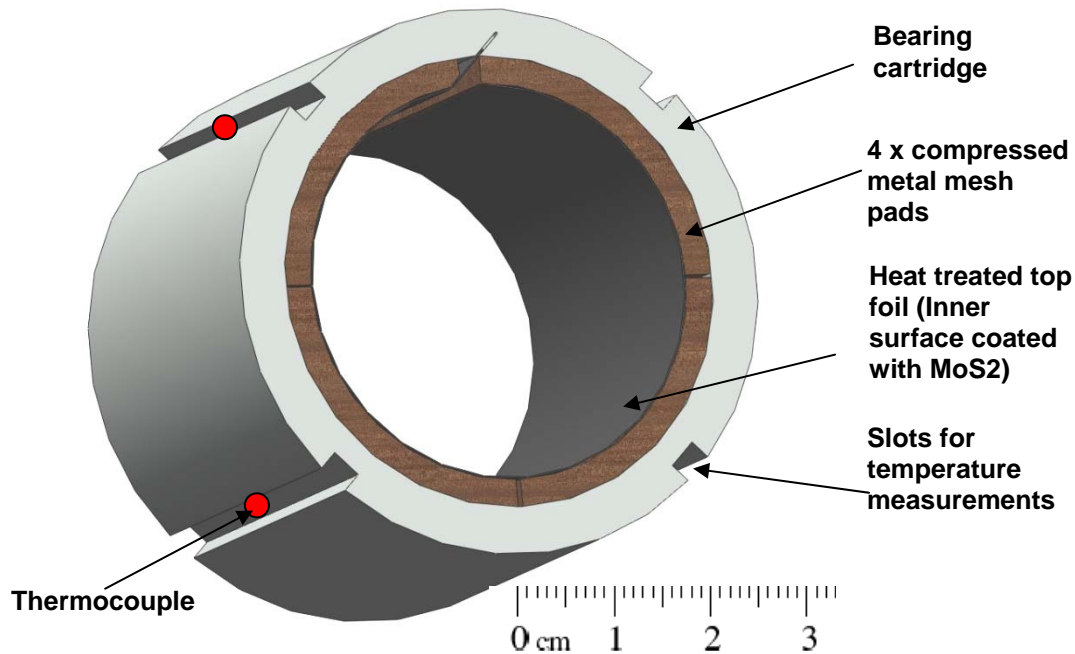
Metal mesh foil bearing with four compressed mesh pads.
